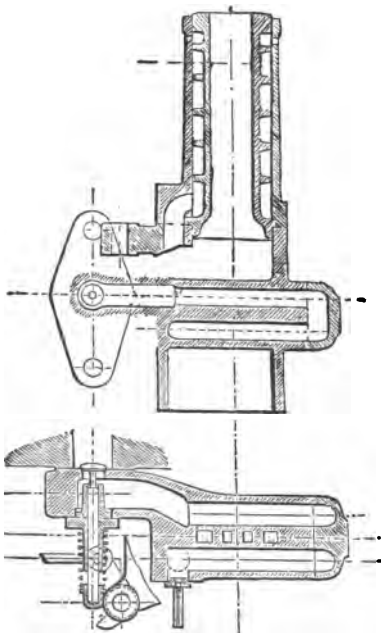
Sectional Elevation and Plan of Crossley's Vaporiser
